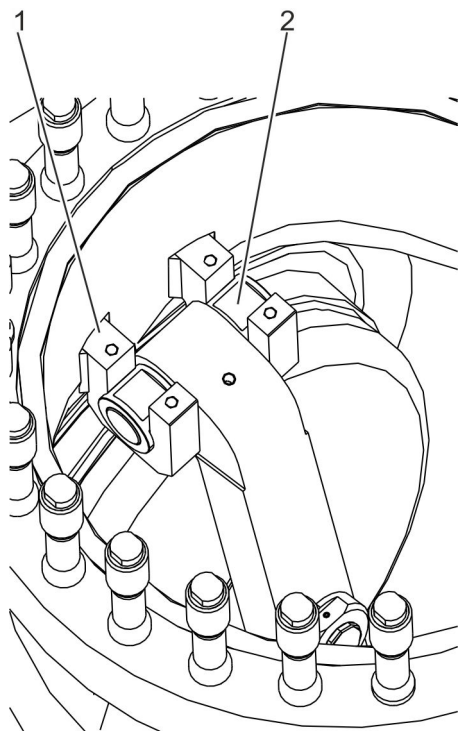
Pay attention to the correct alignment of the bearing bushings
